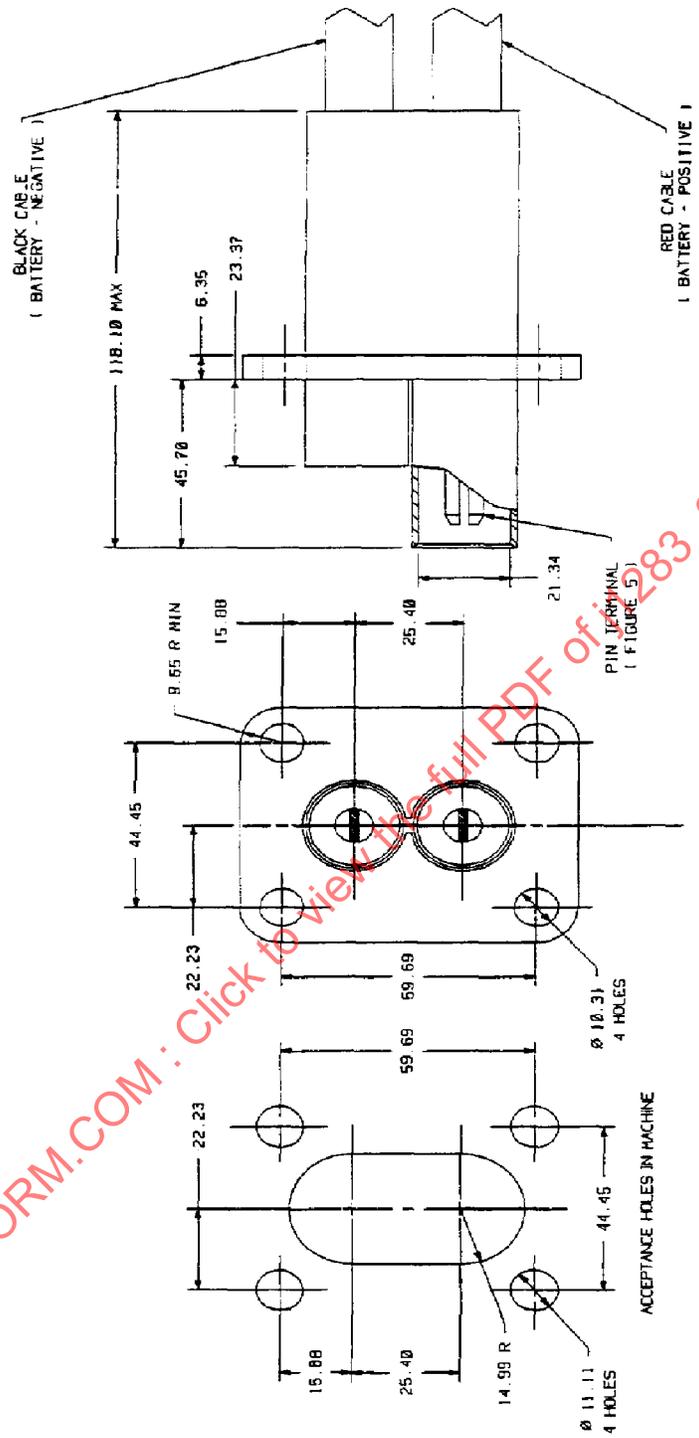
RECEPTACLE ASSEMBLY—STRAIGHT
